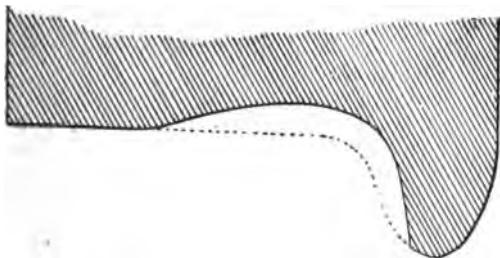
SECTION OF WORN WHEEL TREAD.
